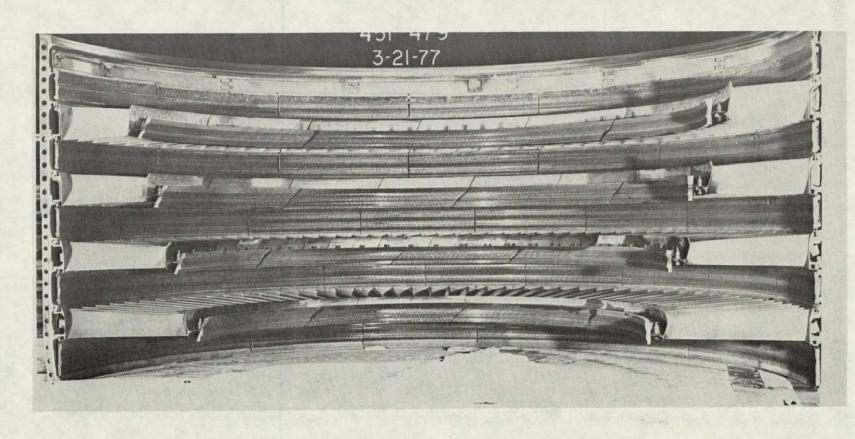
LP Turbine Stator Assembly, Overall View, One Casing.
